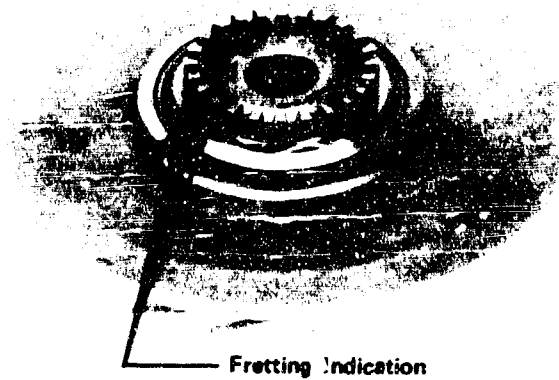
F35138-2 Post-Test View of 2nd-Stage Impeller Showing Fretting Indications on the Face Splines
